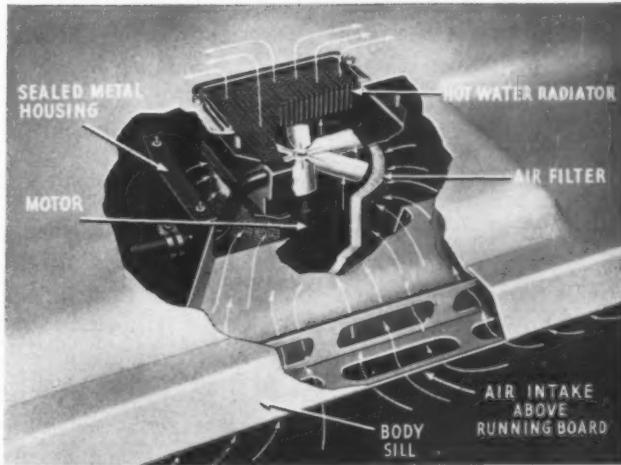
Studebaker air conditioning system consists of a sealed metal housing beneath the floor, containing air filter, hot water core, fan and motor
